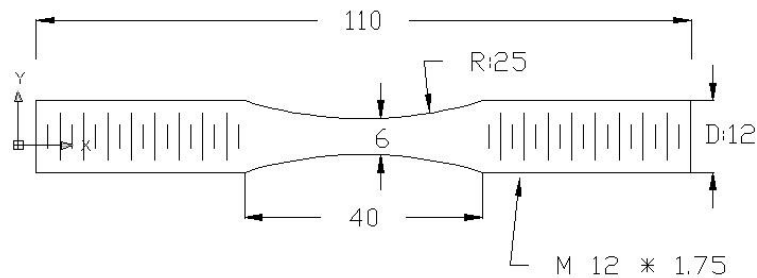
Cantilever fatigue test specimen (All dimensions are in mm)
